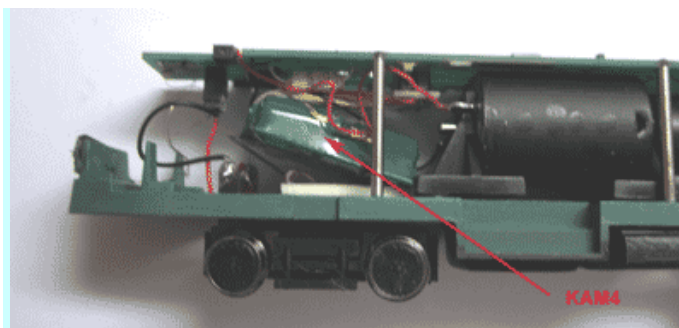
KAM4 installed in Bowser PCC- Right Side view!
